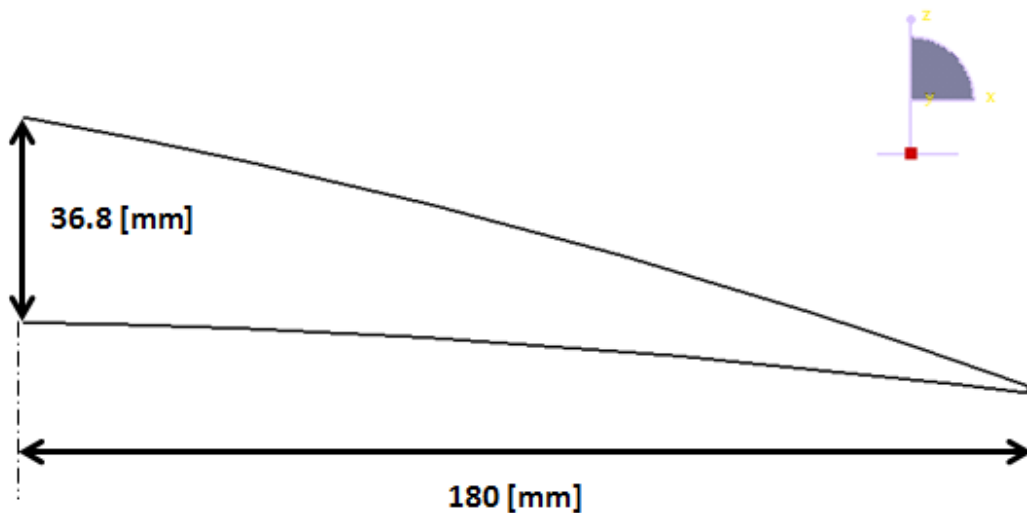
Dimensions of the Control Surface without Pre-Twist – Side View
